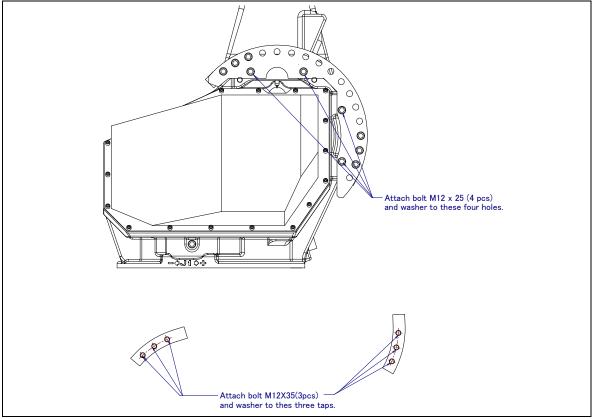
(b) J2-Axis movable mechanical stopper
